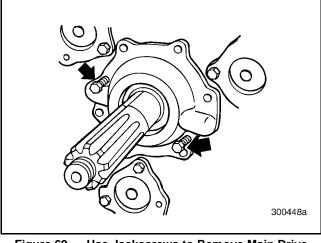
Use Jackscrews to Remove Main Drive Pinion Assembly
